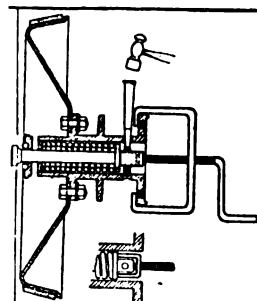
Showing the method of compressing the clutch spring, permitting the lock pin to be removed
